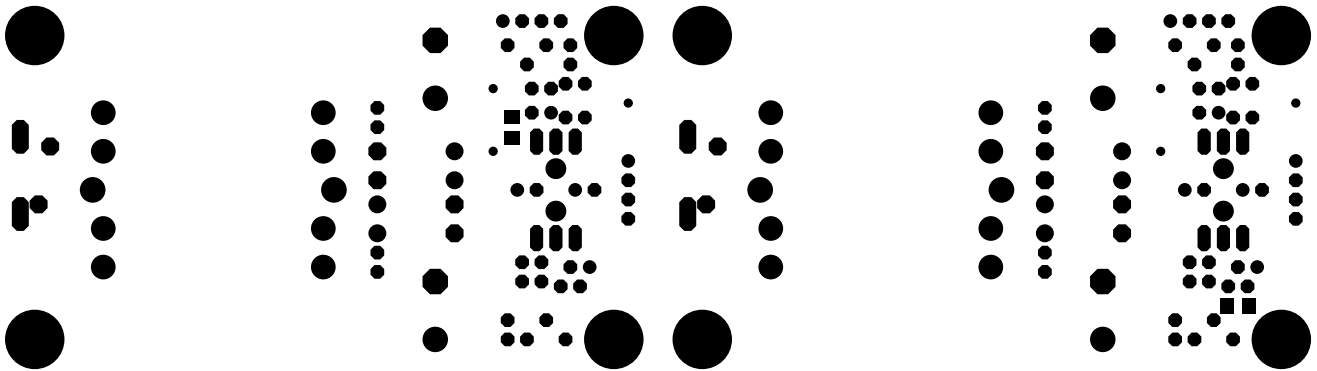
$\pm 18$  V linear power supply top and bottom solder mask. Left image is top solder mask.
